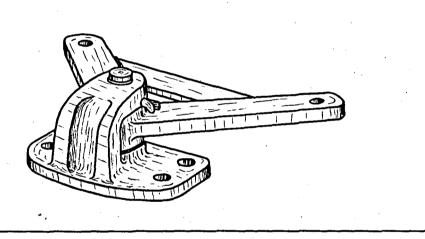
PRESENT STANDARD CRANK & CRANK STAND ASSEMBLY.
